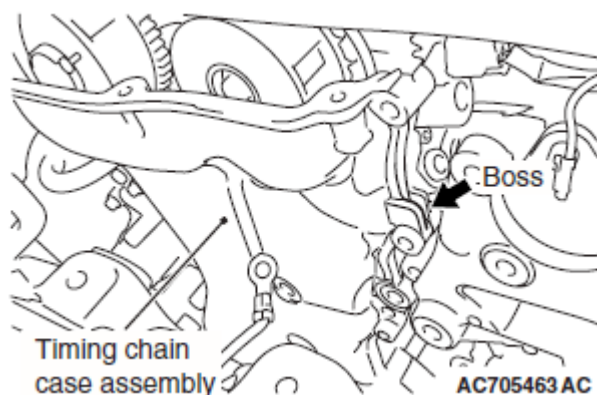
Locating Boss Of Timing Chain Case Assembly
